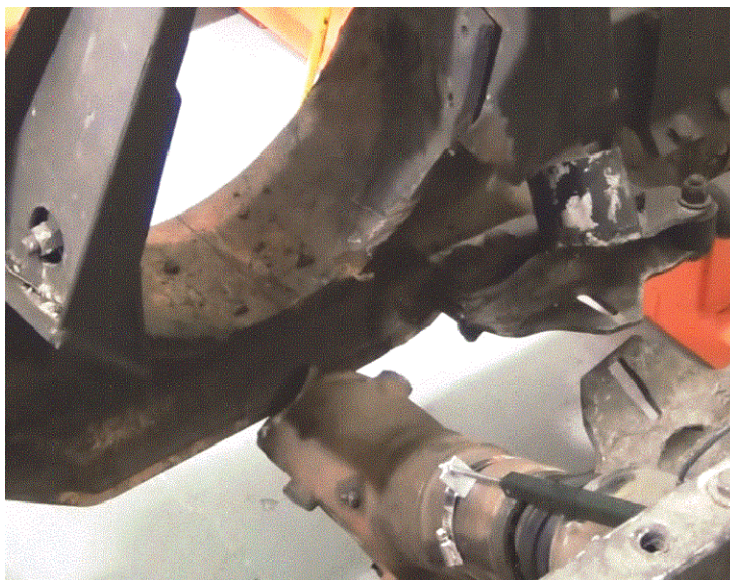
Greyhound 6352 Reassembled Fractured Bearing Journal
